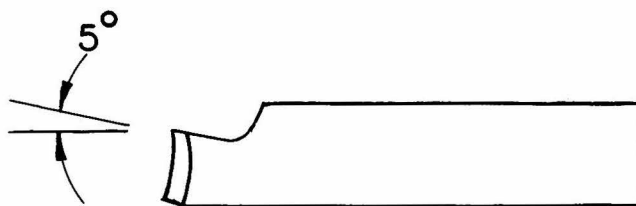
HOBBED CHASER FORM FOR CUTTING IRON AND MILD STEEL.
